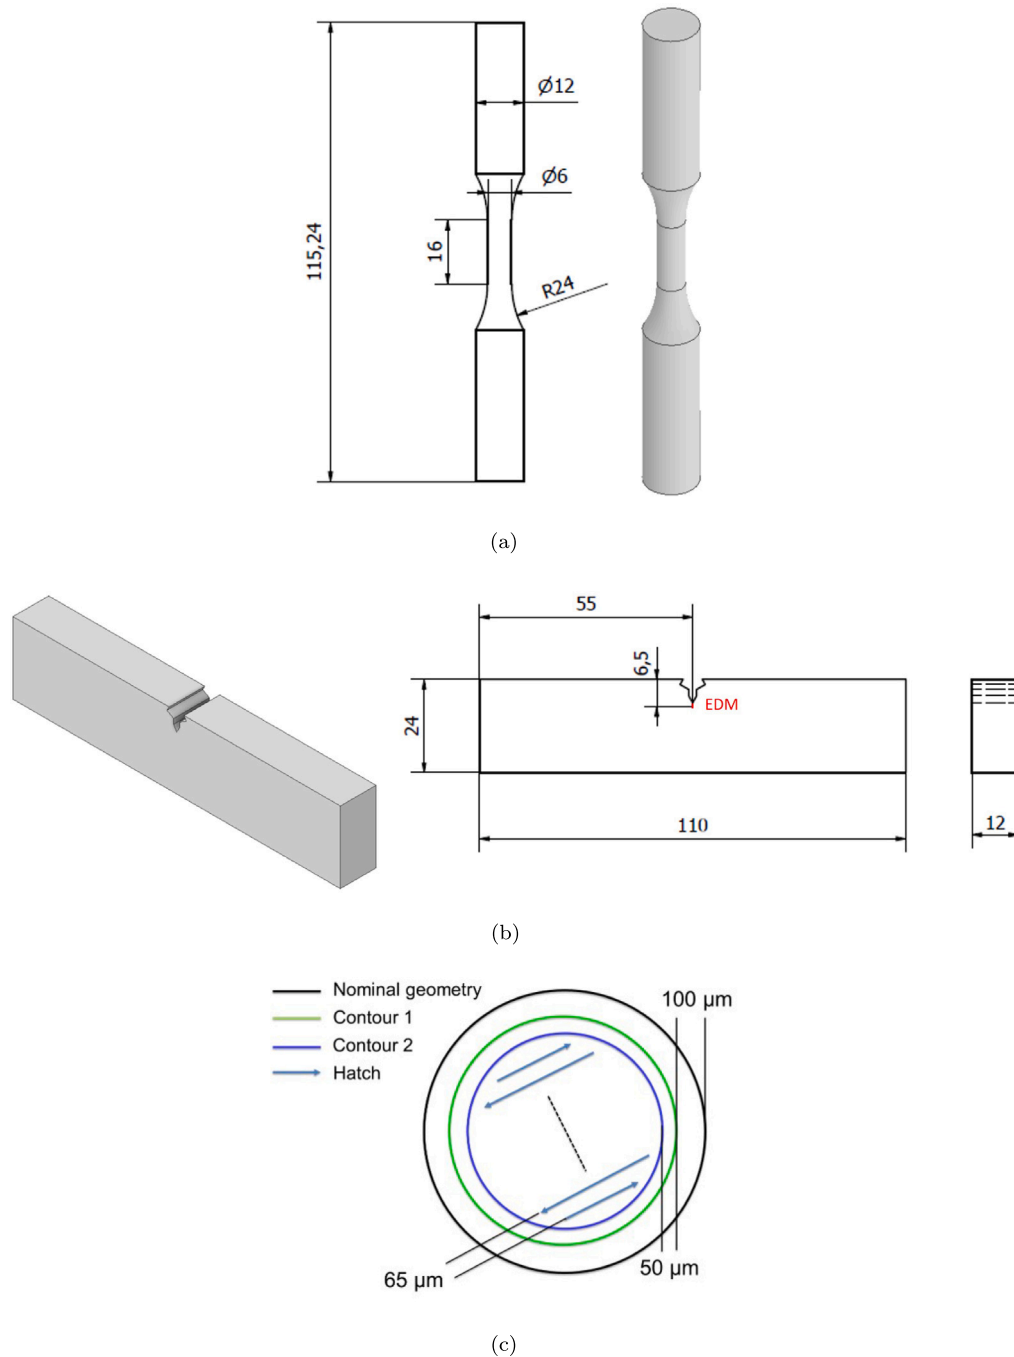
(a) Axial specimen for high cycle fatigue tests; (b) Single edge-notched bending specimen for fatigue crack growth tests; (c) Printing strategy represented on the cross section of the axial specimens.
